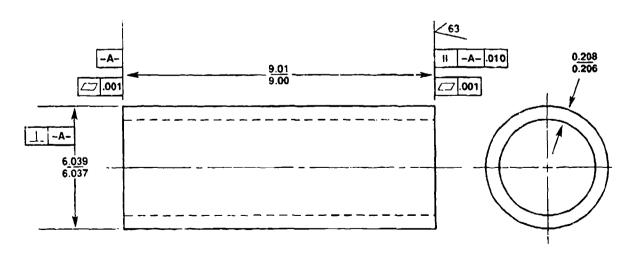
Dimensions of the model scale cylindrical pressure housings.
